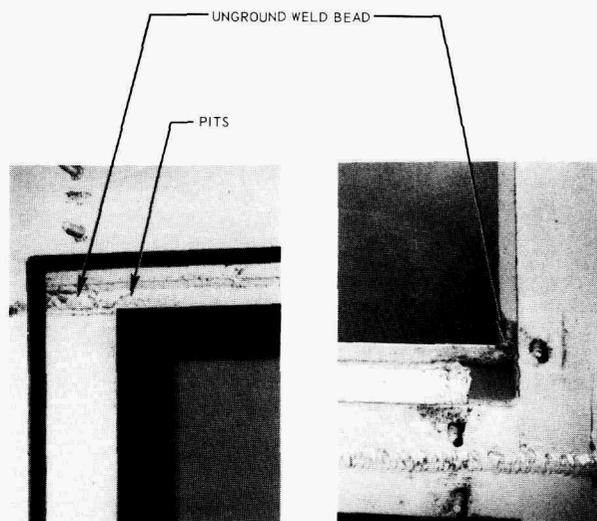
Unacceptable finish on filter seating surfaces. Courtesy Mound Laboratory.
